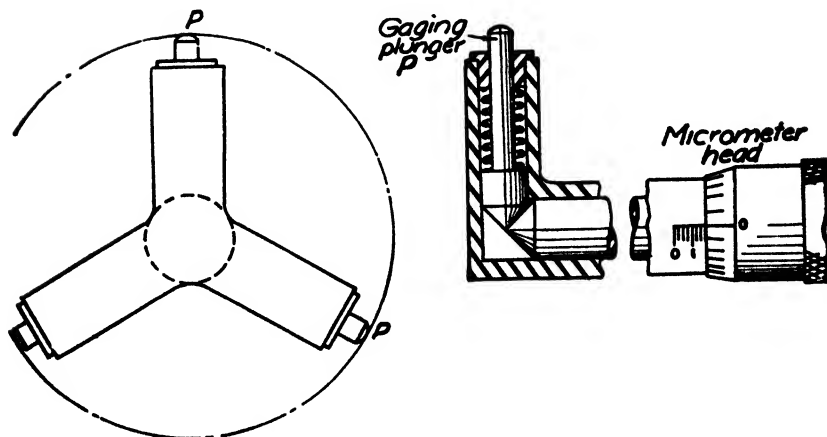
Star Gage for Three-point Measurement of the Diameters of Deep Holes.
